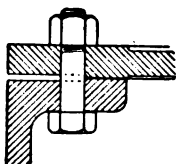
Narrow joint, with head of bolt inside vessel.
